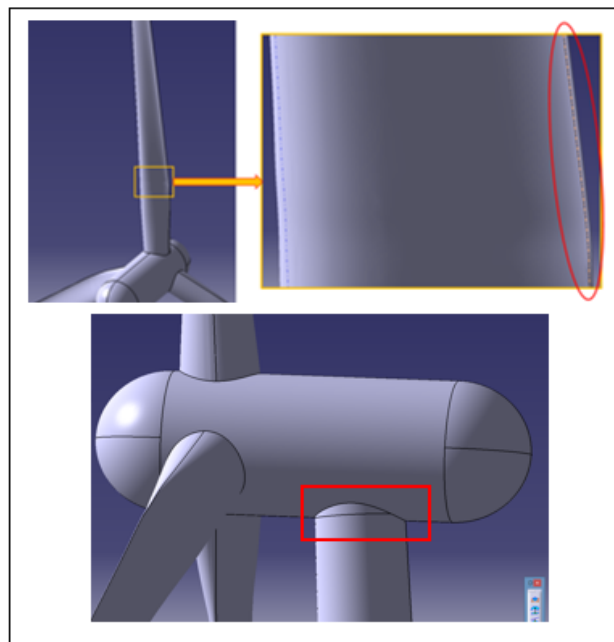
Geometry issues in reference model; (a) Top – Blade edge geometry (b) Bottom – Turbine tower geometry
